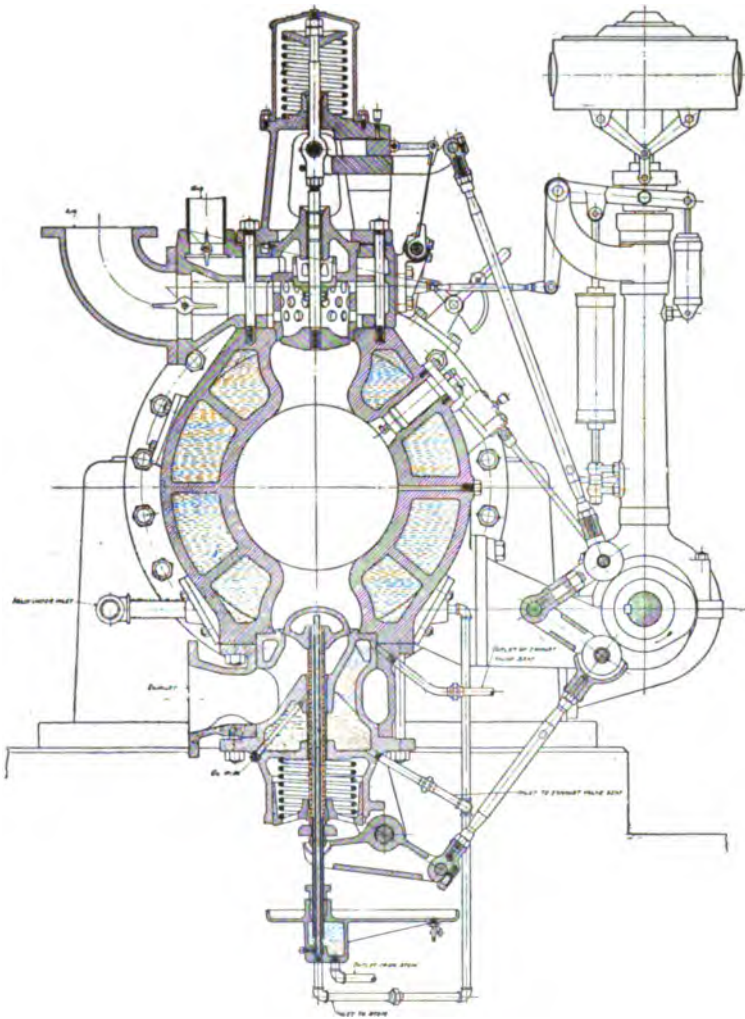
Valve Gear of Warren Single-acting Tandem Engine.
